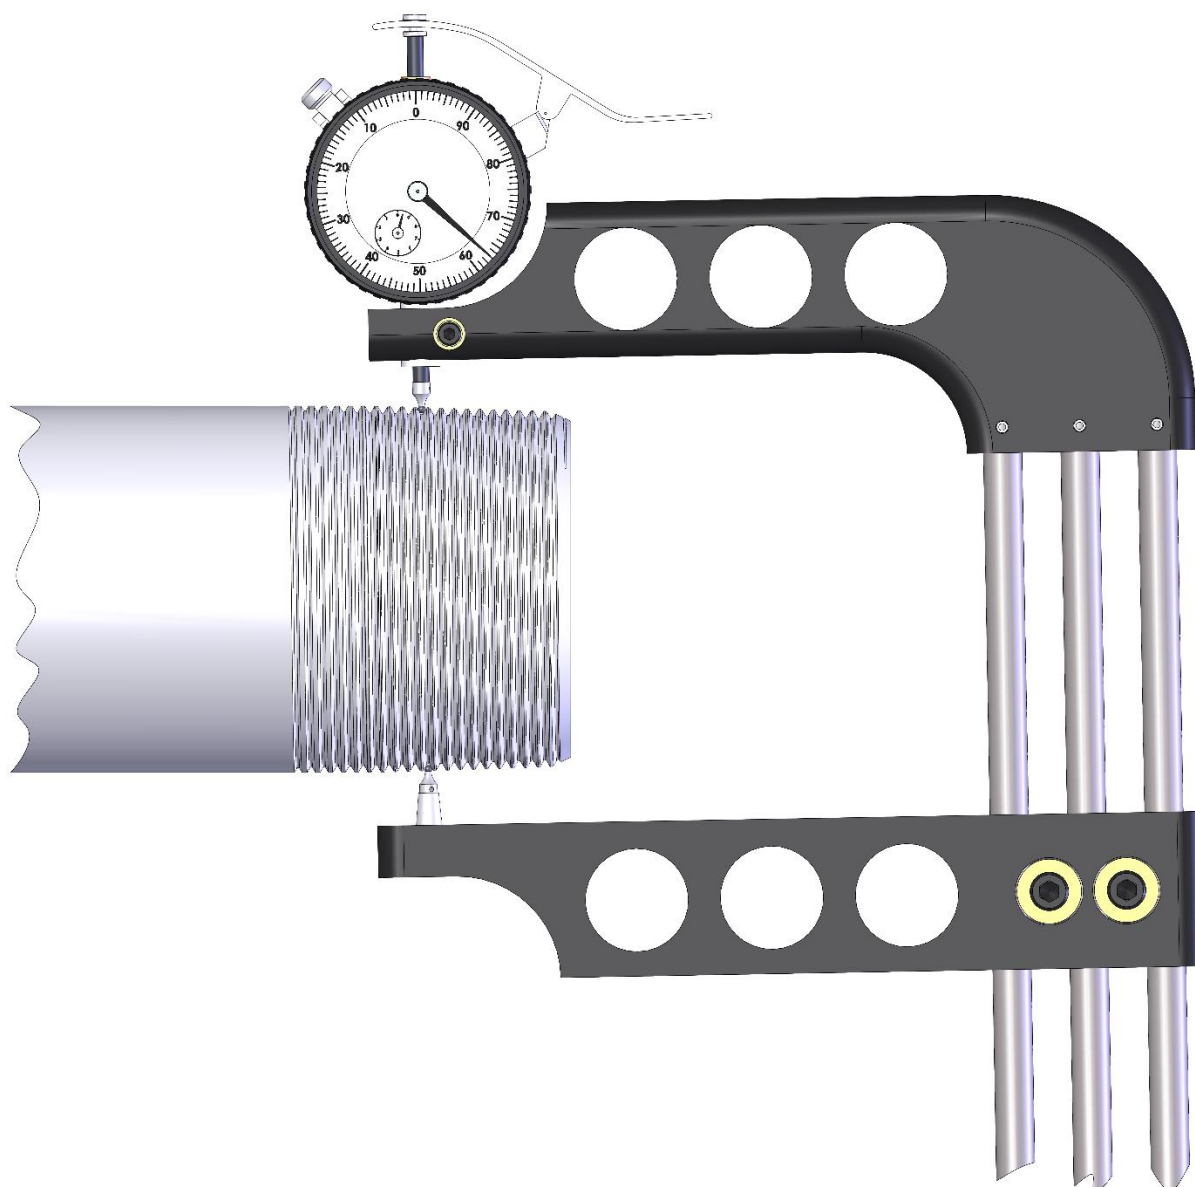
External Thread Taper Measurements (Measurement at Last Perfect Thread)
